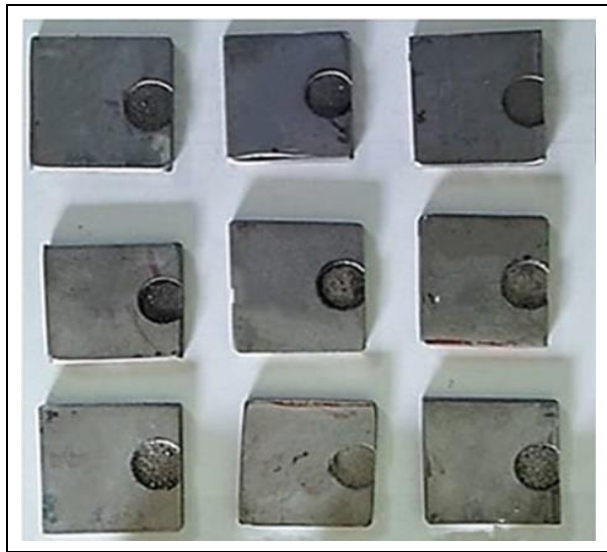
Inconel 625 after EDM Machining with Al-Ni Electrodes
